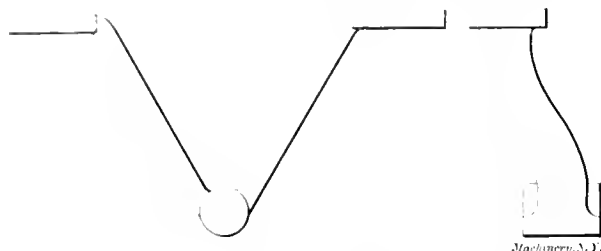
Example of Forging Work which can be facilitated by using a Surface Plate.
